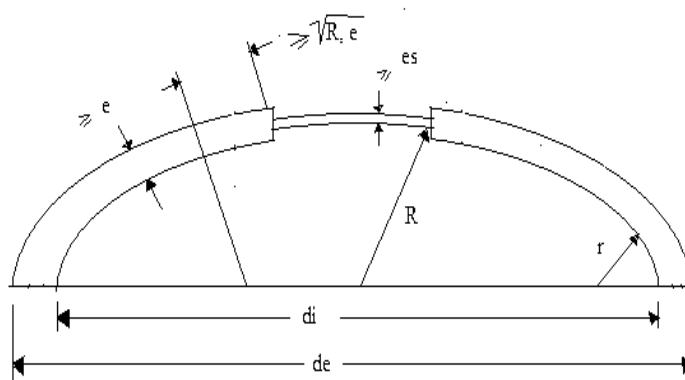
Schematic drawing of Kloepper type torispherical end
